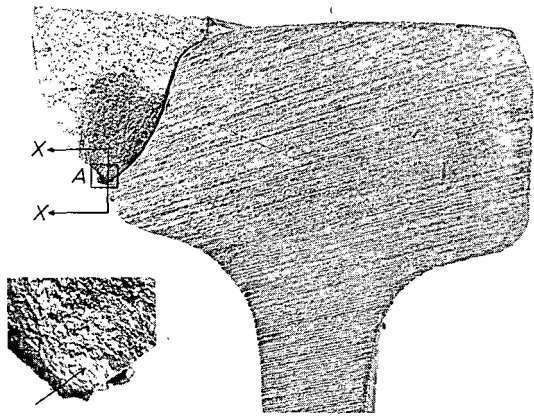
, Sections of Cracked Wheel Flange and Worn High Rail
